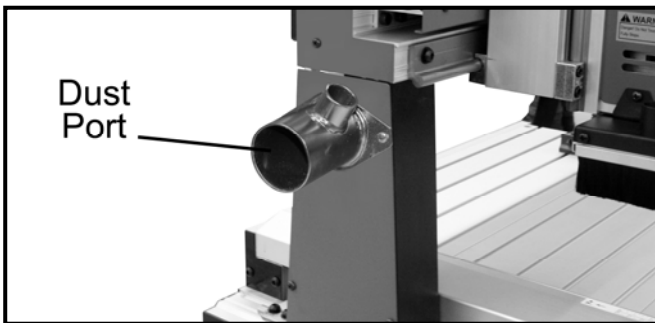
Installing the dust port (when using the machine without the safety enclosure)
